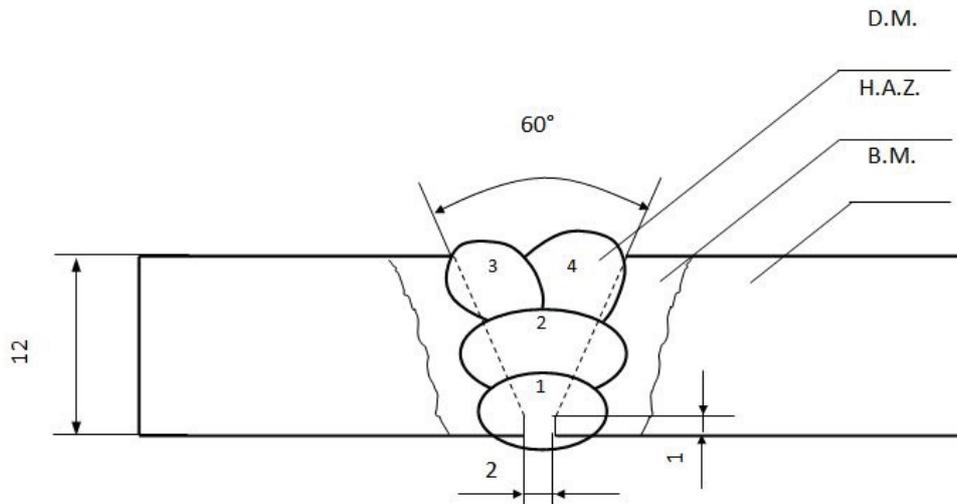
The arrangement of the deposited metal in the welding joint (D.M. - deposited metal, H.A.Z. - Heat affected zone, B.M. - base metal)
